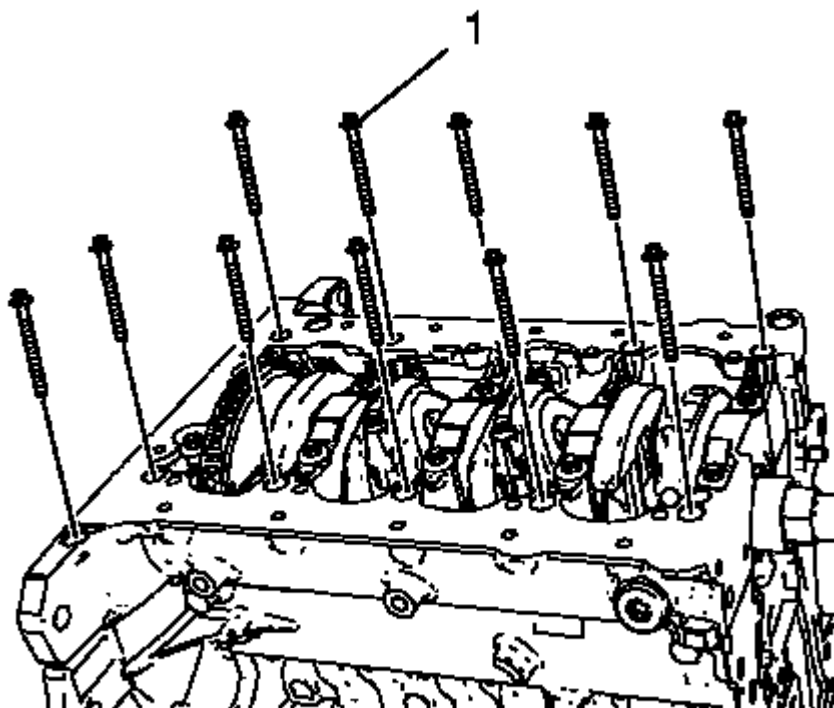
Outer Crankshaft Bearing Cap Tie Plate Bolts
